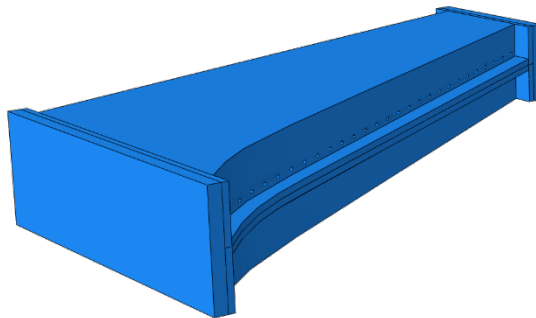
GKN mould prepared for TO by extruding top and bottom surface of the mould illustrated in Figure 1.
